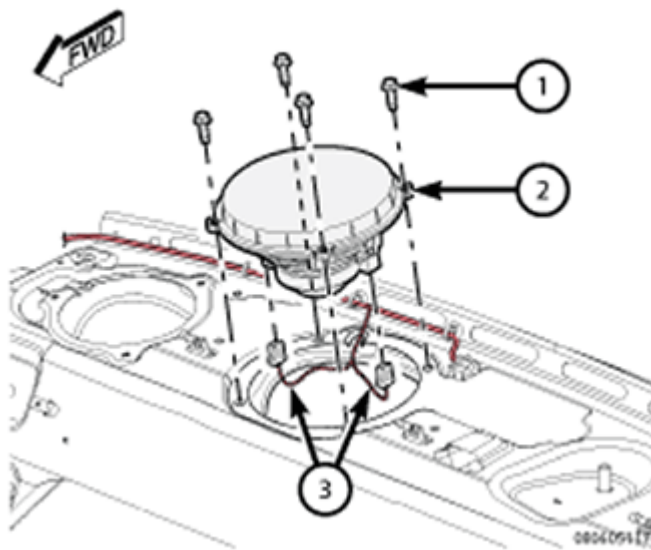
Subwoofer, Wire Harness Connectors & Screws
